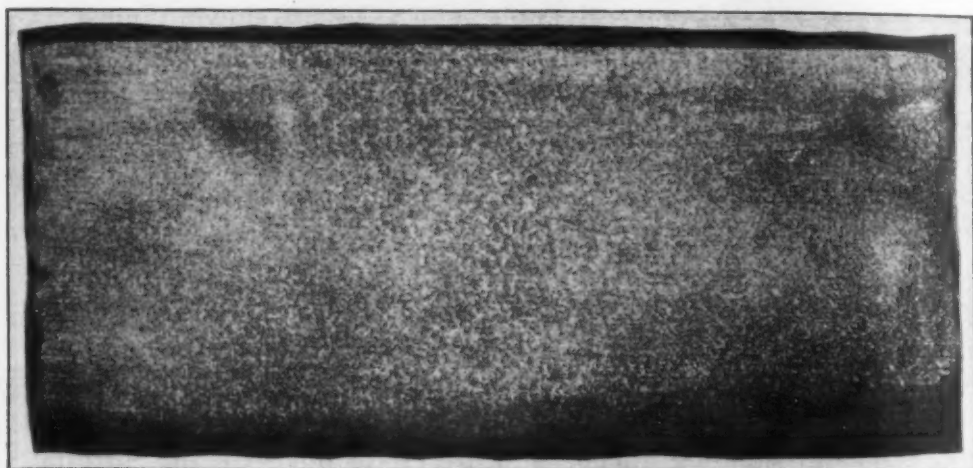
Steel Forging Cut by Oxy-acetylene Blowpipe, taken at nearly Full Size. The Structure of the Darkened Area on Upper Side has been Altered by the Heat Incident to Cutting.
